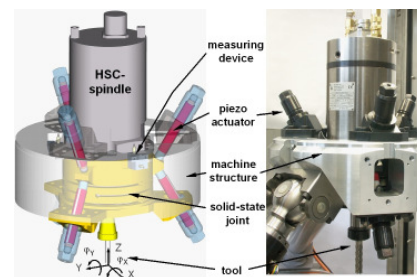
The CAD model of the adaptive spindle support (left) and real component (right) mounted in a Parallel-Kinematic Machine (PKM).
